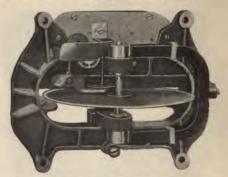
Back View of Supporting Frame, showing Suspension Magnet, Rotating Parts, and Dial Train Connections.
